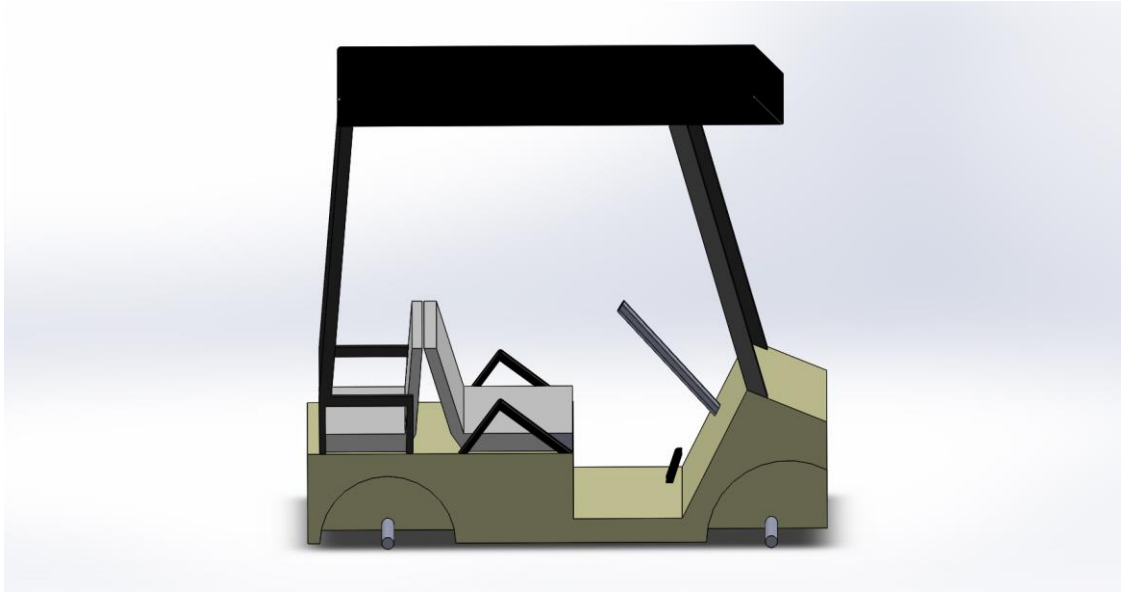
The body of the golf cart depicted from a side view, showing the cut out wheel wells
